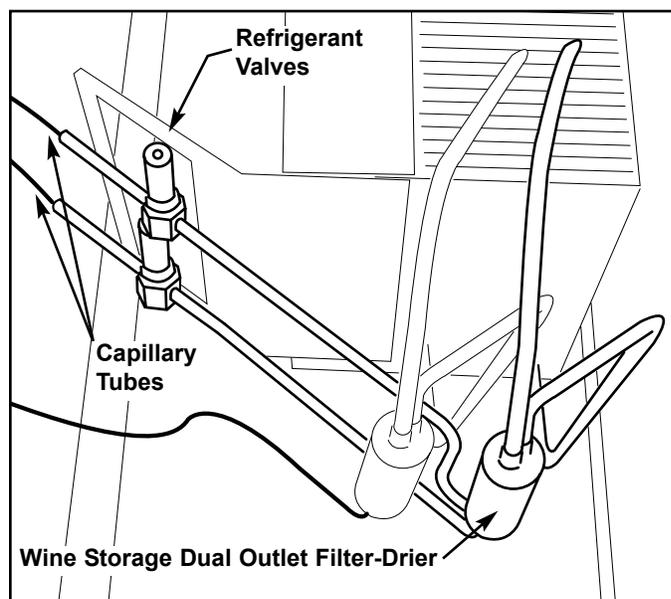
Capillary Tubes, Refrigerant Valves, Dual Outlet Filter-Drier
